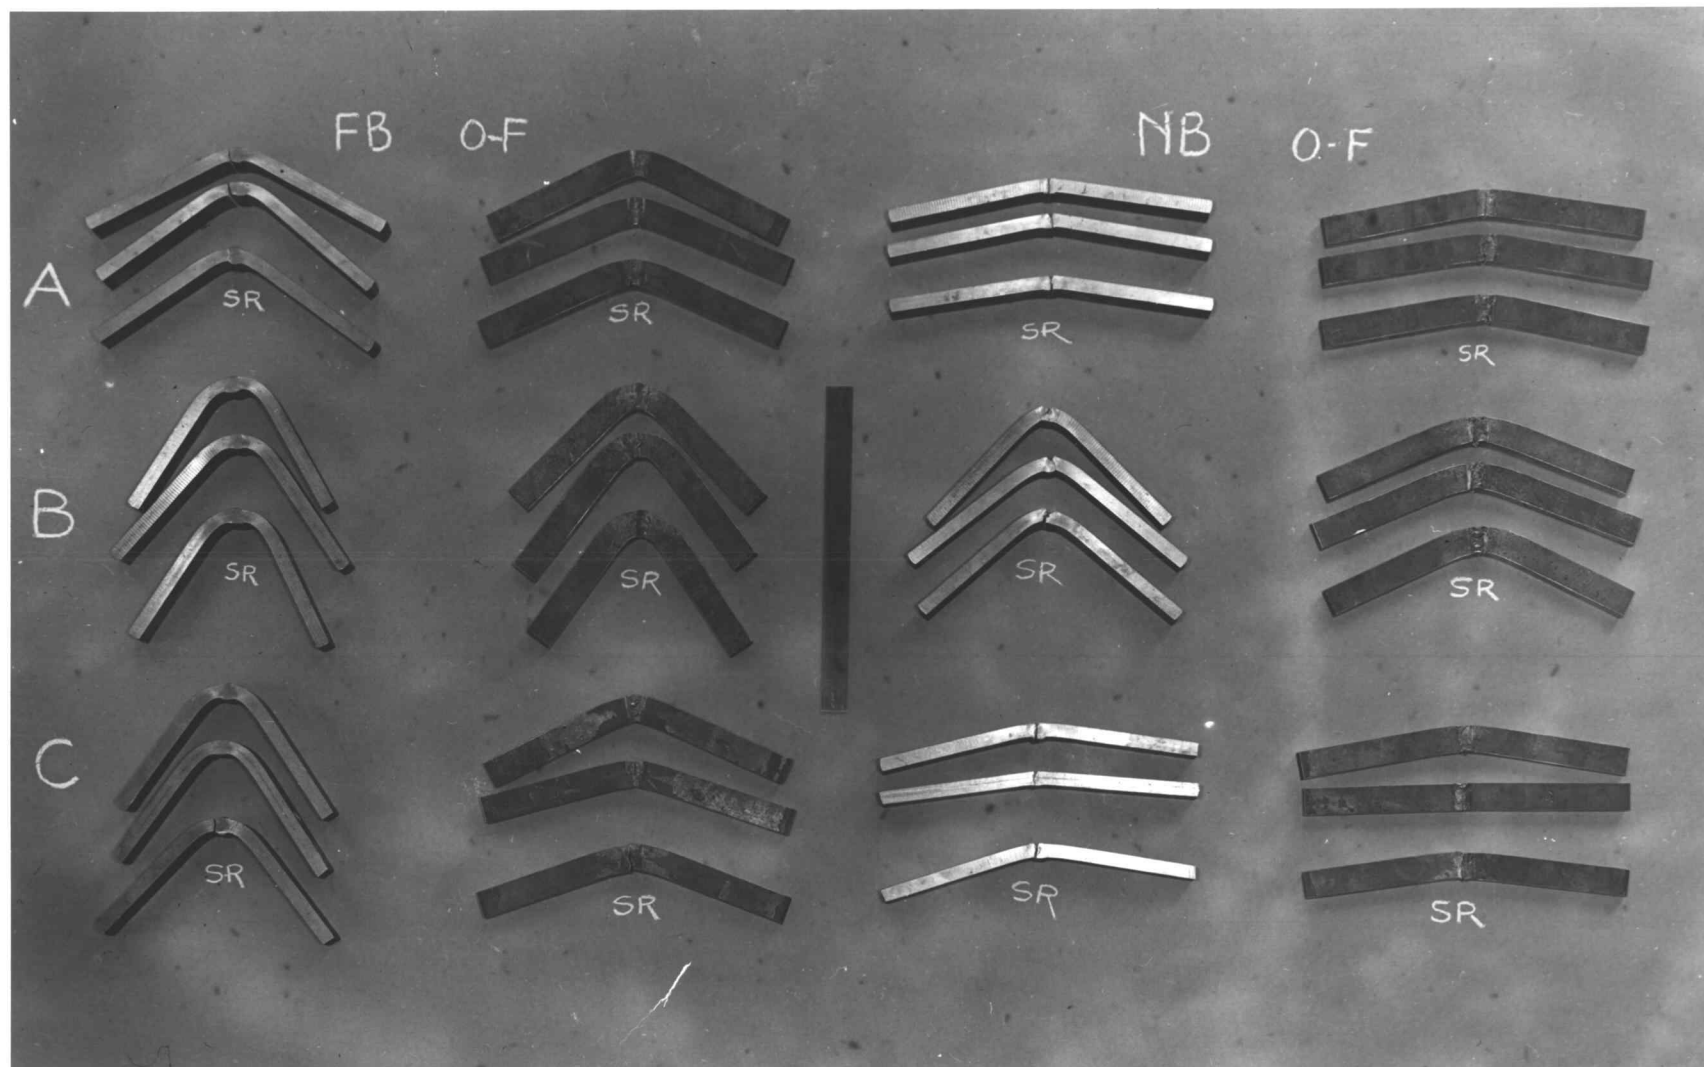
Notched and Free Bend Specimens After Fracture at 0 F
